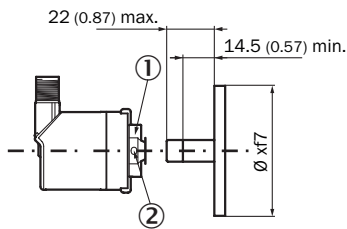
Encoder with flange for blind hollow shaft (mounting suggestion)
